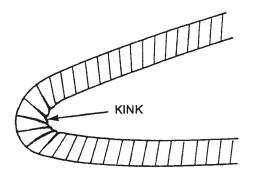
Repair Necessary. Damage Due to Bending Beyond Minimum Bend Radius
